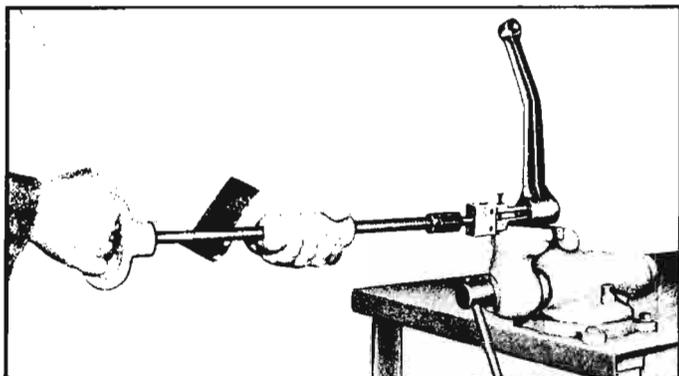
Removing Bushings with J-5822 and J-2619
